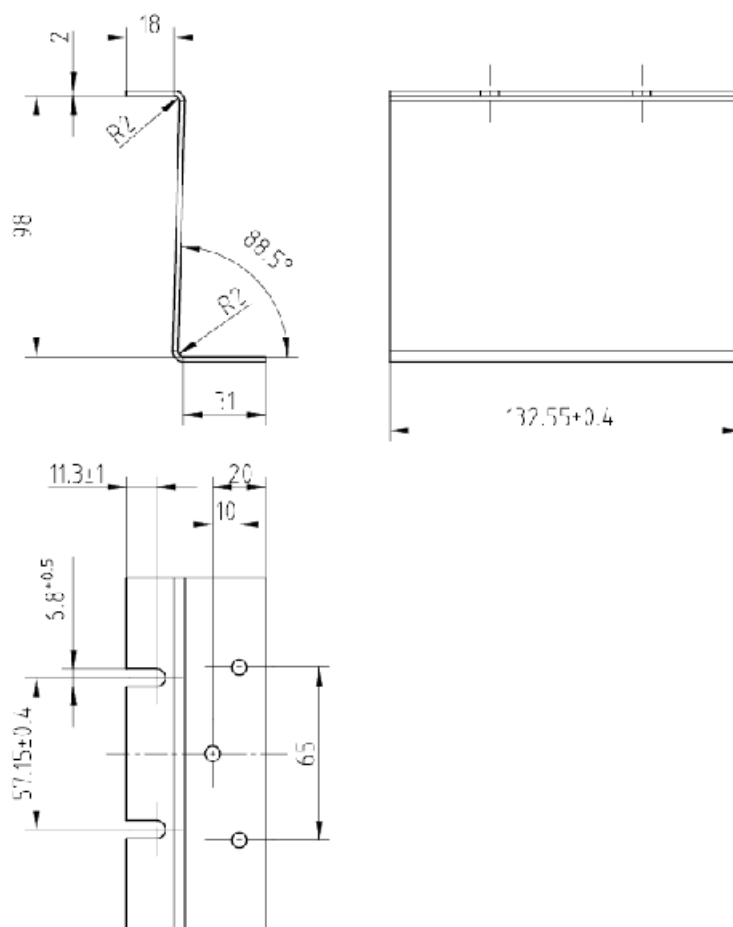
Side part of mounting support for X-300EEC (dimensions in mm)
